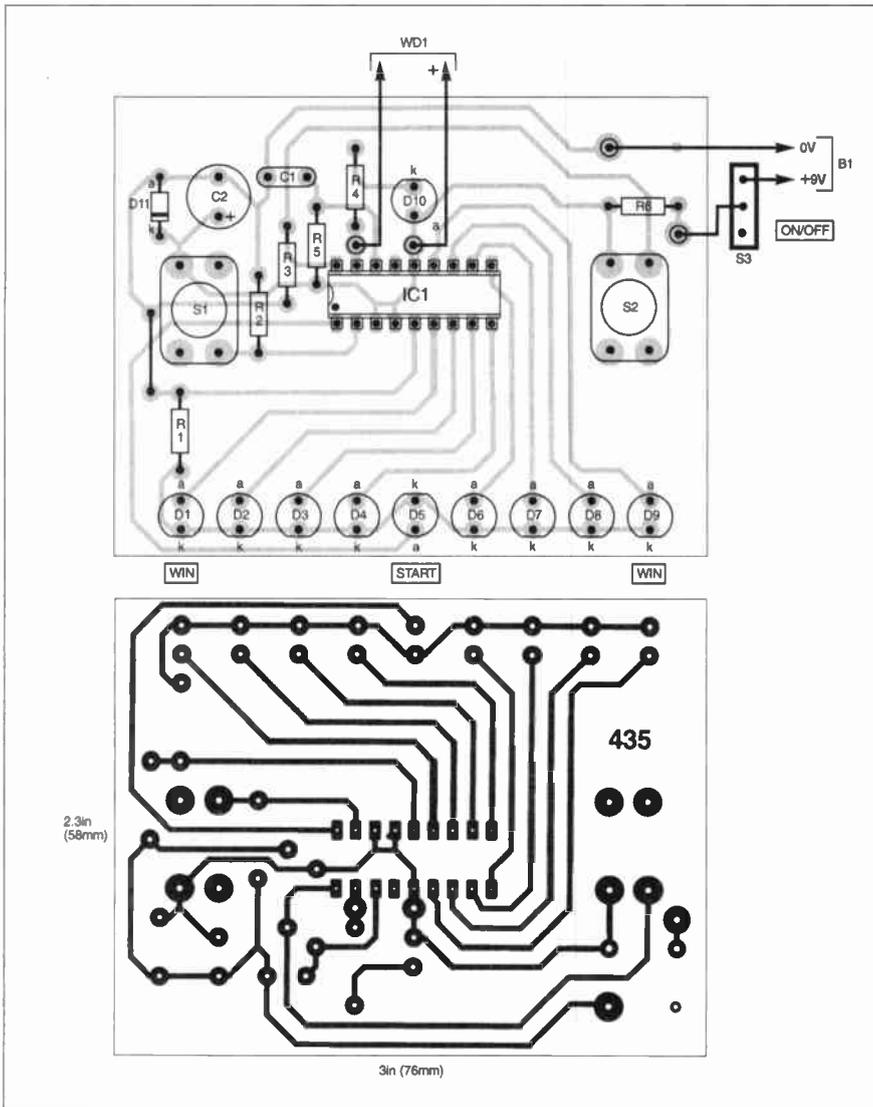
Printed circuit board component layout, full-size copper foil master and wiring details for the PIC Tug-of-War.
